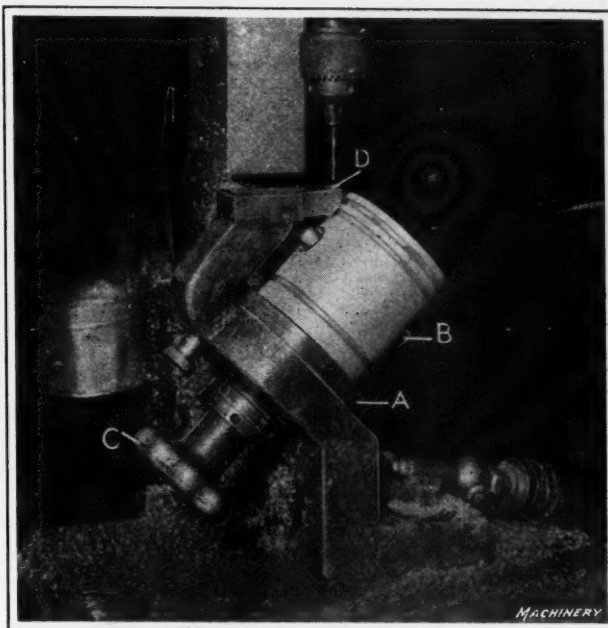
Jig for drilling Two Inclined Oil-holes leading to Wrist-pin Bearings
